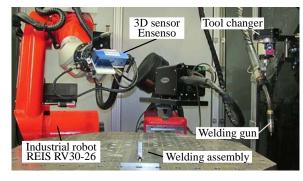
Setup of robotic welding system at Fraunhofer IPA.
